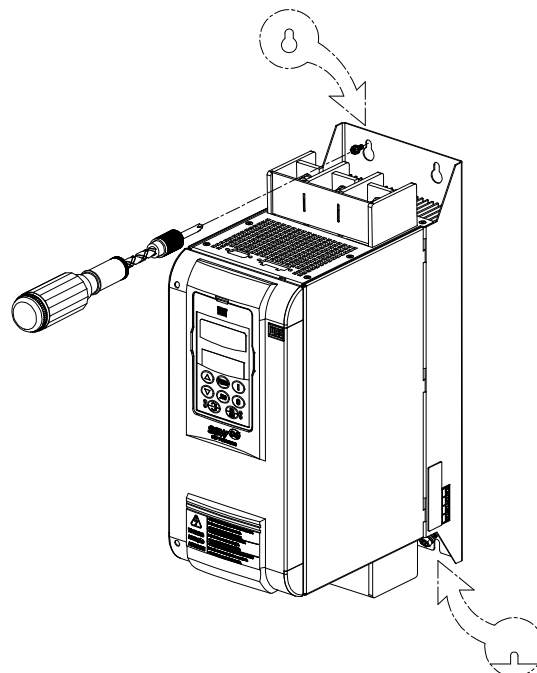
Mounting procedures for the SSW-06 on a flat surface
